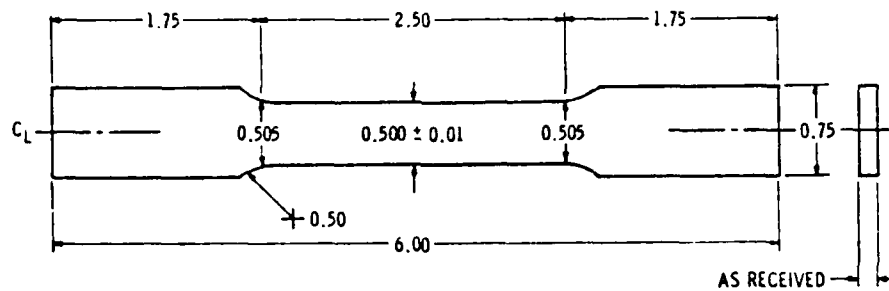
Transverse Tensile Specimen (Fusion Welded)
